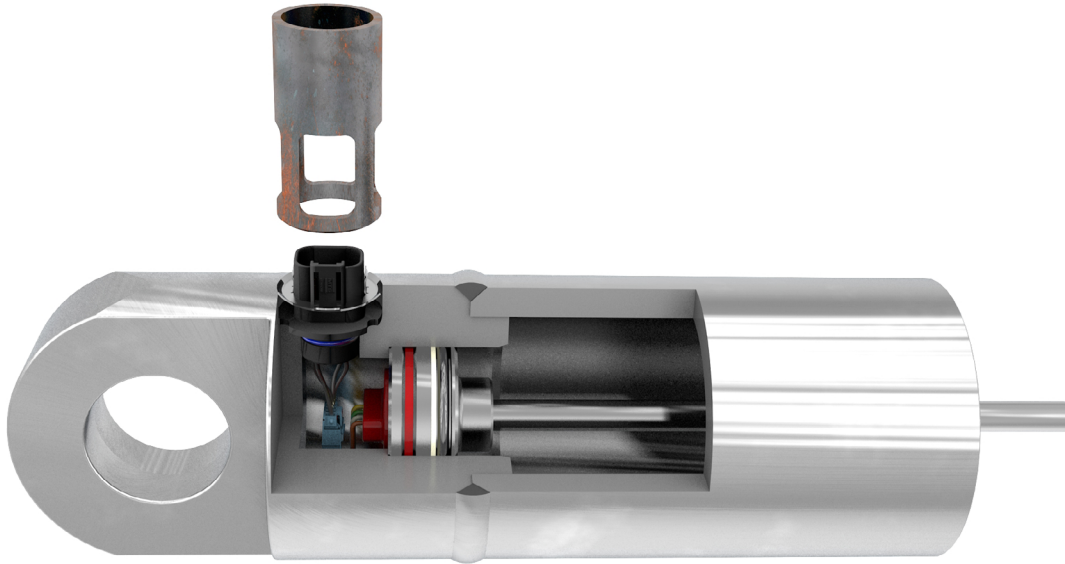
Mounting sensor with DT Connector – 1-piece version, part 2
